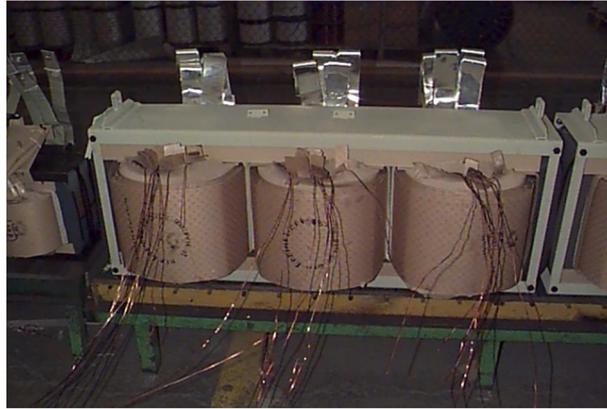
Three-phase shell-type transformer after the process of iron core-winding assembly. The proposed H-L configuration has been used.
